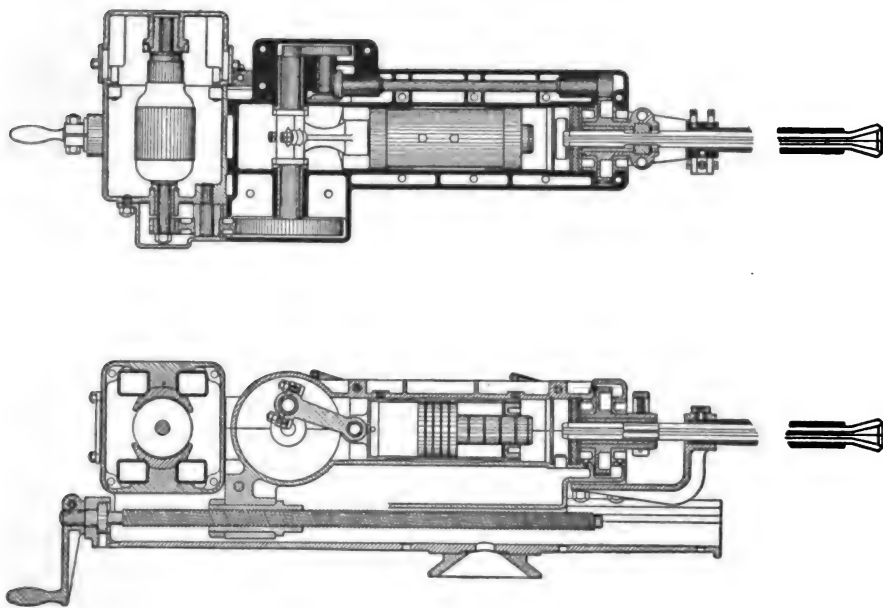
SECTIONAL VIEWS OF BOX ROCK DRILL.
